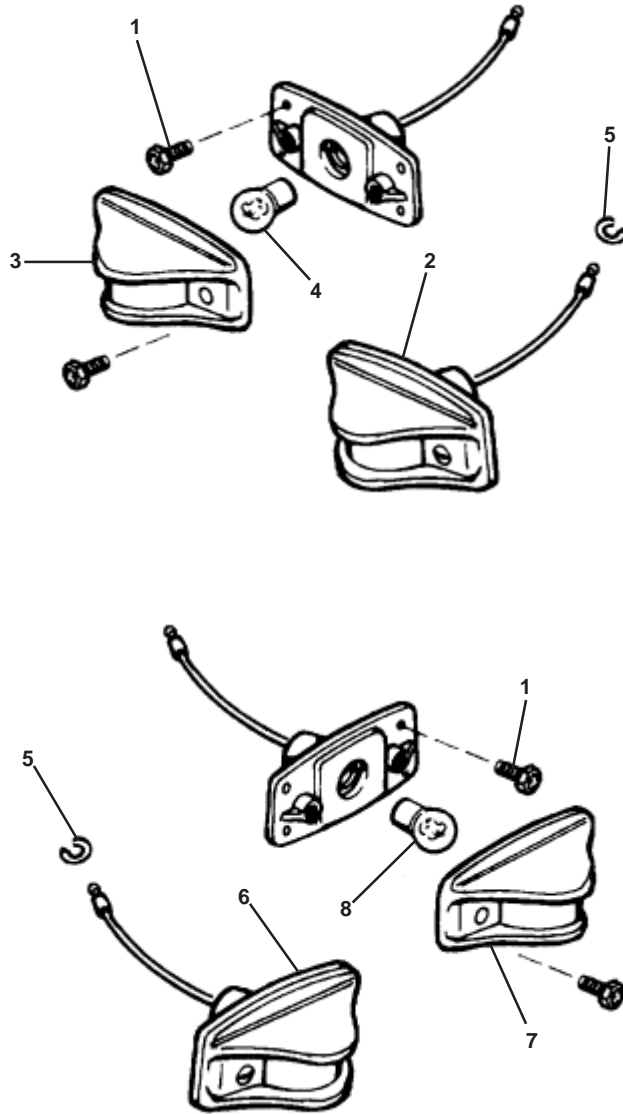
CLEARANCE LIGHT ASSEMBLY.
